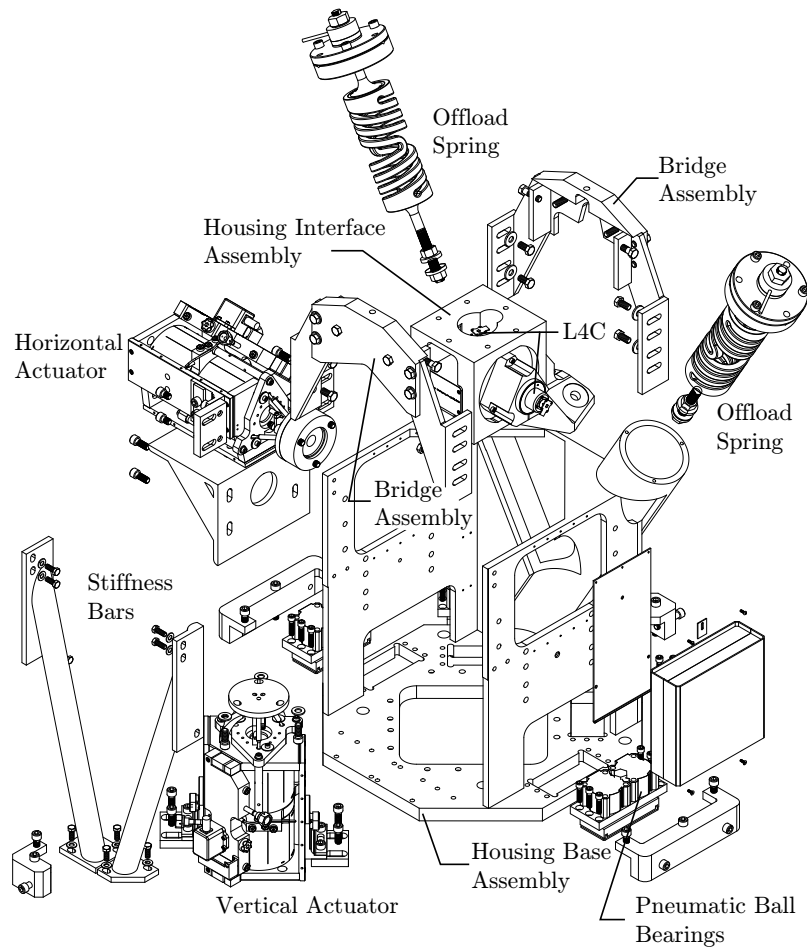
An exploded view of the as-built actuator housing design. Courtesy of Oddvar Spjeld.
